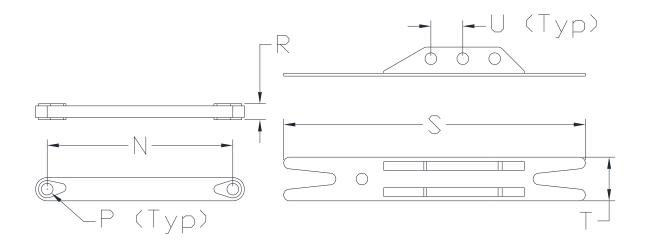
Stiff Arm & Mounting Pad Dimensions
